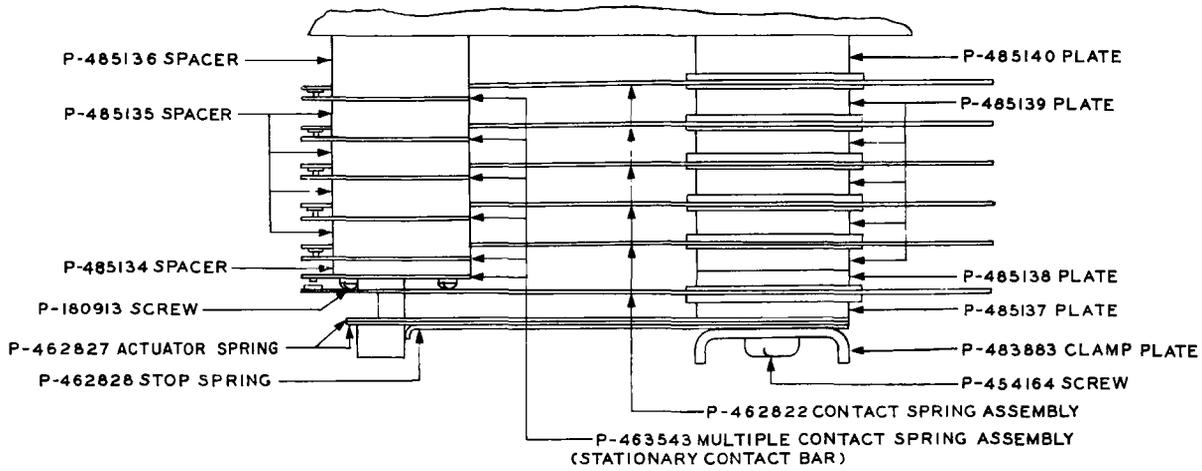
KS-13835 L6 Reader—Control Contact Assembly—Contact Spring Assemblies and Associated Parts—P and P' Contacts
